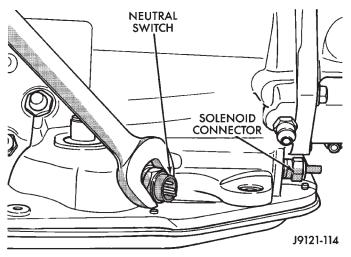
Park/Neutral Position Switch Removal/ Installation
